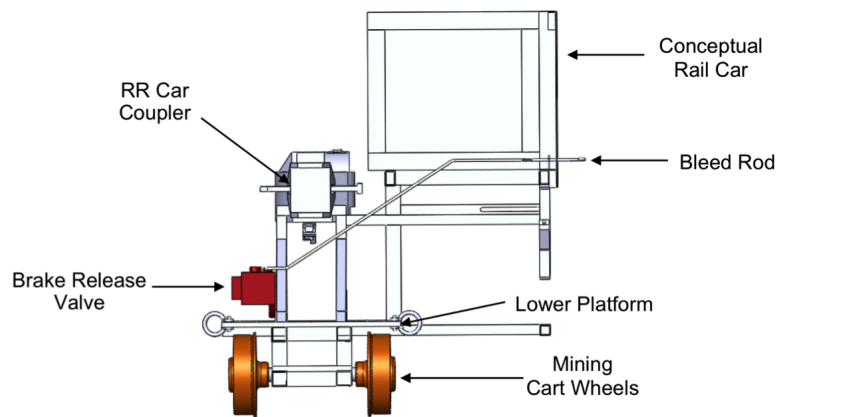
Left View (SolidWorks) of first Bleed Rod design
